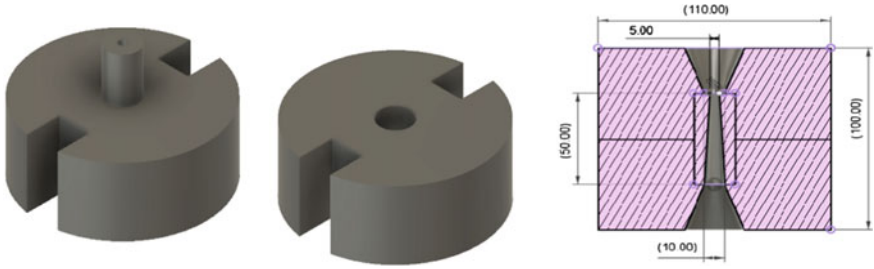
Fixture/tooling for circular in-line extrusion “die insert” pattern
